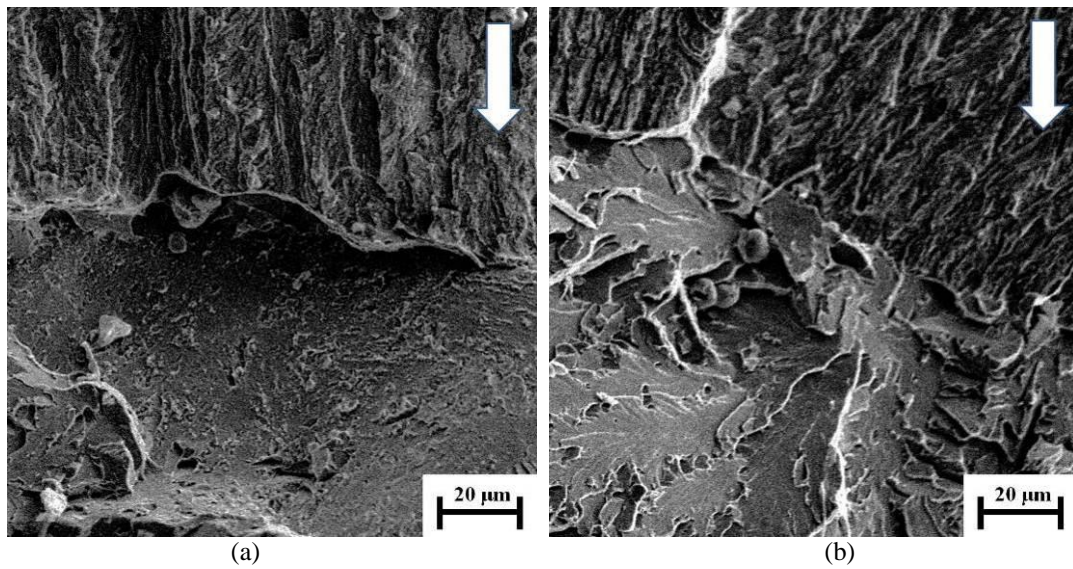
Plane-strain fracture surfaces of the C bloom specimens at the onset of crack propagation; surface (a) and core (b) samples. Arrows indicate crack propagation direction.
